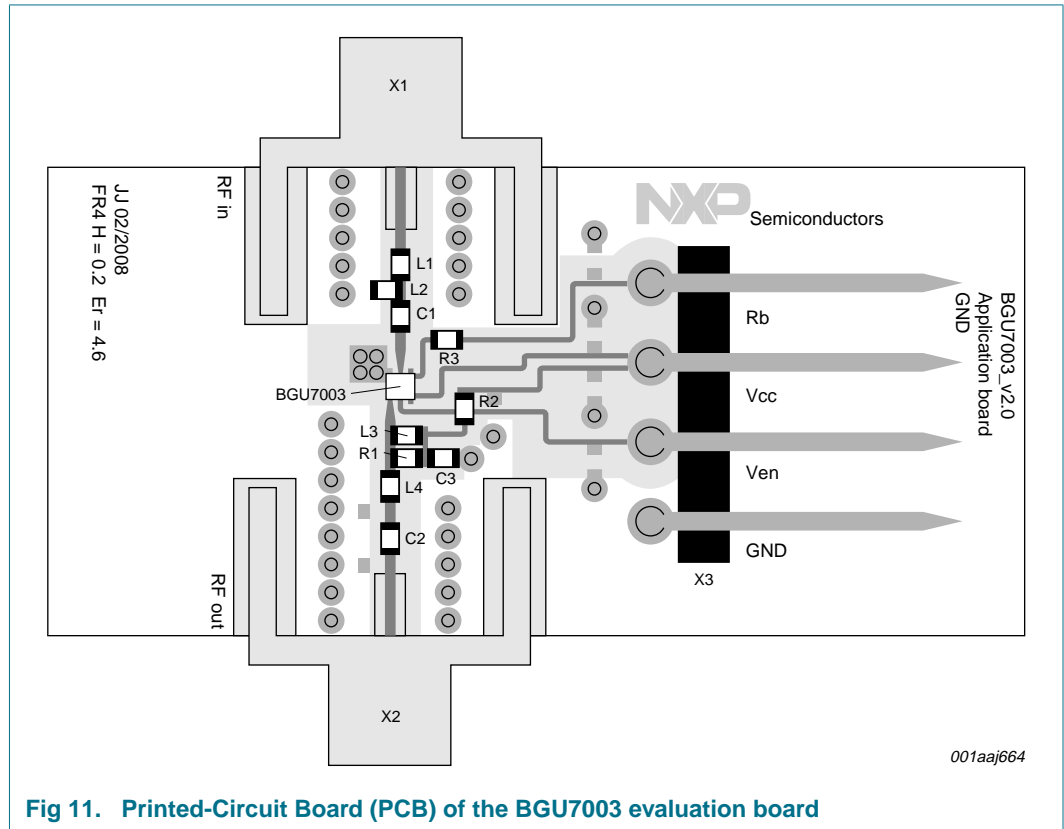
Printed-Circuit Board (PCB) of the BGU7003 evaluation board
